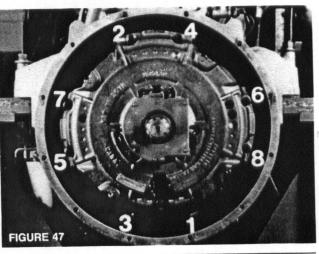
and slide the assembly forward until it starts in the flywheel pilot. (Fig. 45) Start six 7/16" Grade 5 (or better) mounting bolts with lock washers and tighten finger tight. (Fig. 46) Tap the aligning tool to make sure it is centered and seated in the pilot bearing, then remove the two guide studs and replace them with the 7/16" bolts and lock washers. (Fig. 47) Tighten the 8 bolts progressively in the sequence shown. Remember that if the bolts are not tightened in sequence it can cause permanent damage and/or an out of balance condition. The final torque is 45 to 50 lb. ft.
